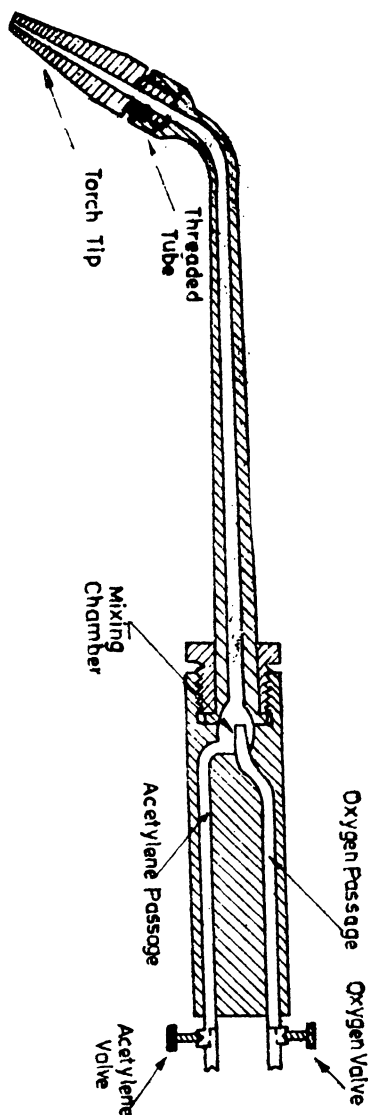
4. Welding torch—Equal pressure type.
